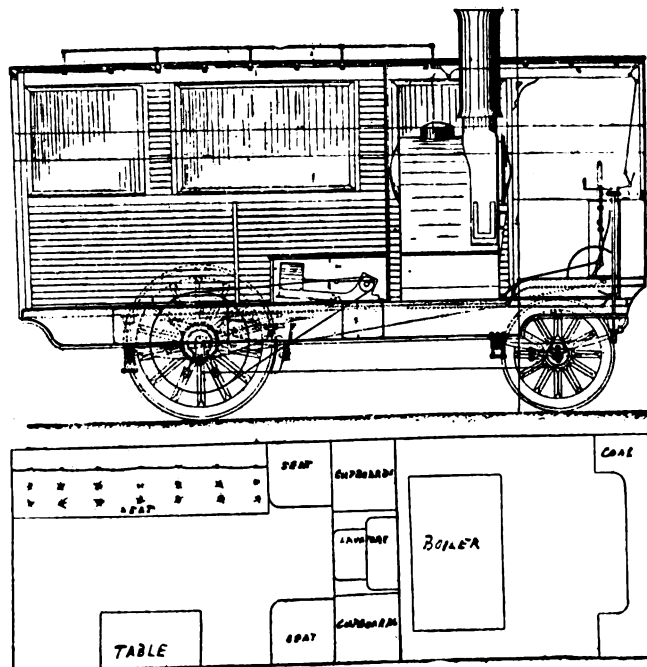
SECTIONAL ELEVATION AND PLAN OF TURGAN-FOY CARAVAN.
